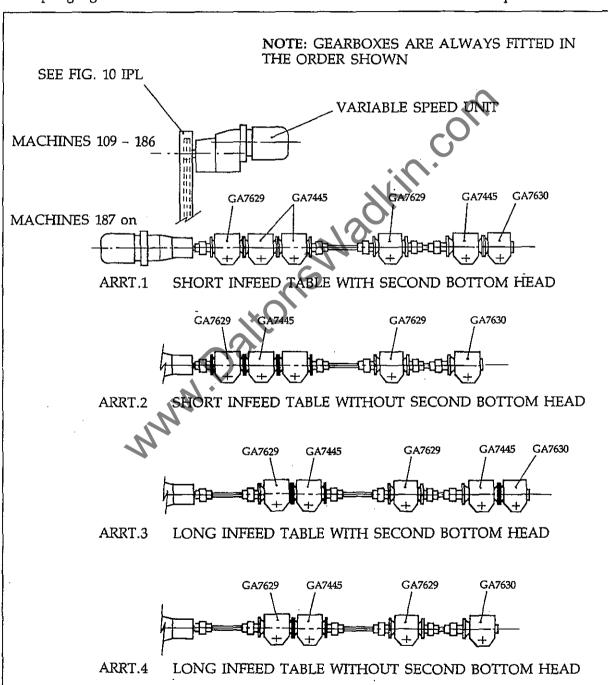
FEED ROLL DRIVES AND GEARBOXES
